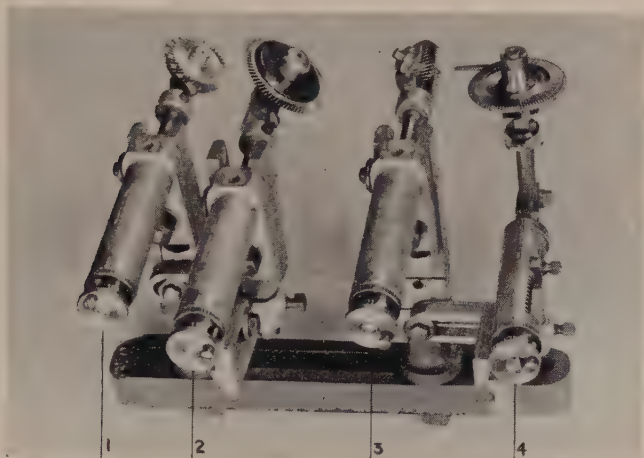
Single plush with single backing and jack presser: (1) plush feeder; (2) clearing bur; (3) sinker bur; (4) jack presser.
